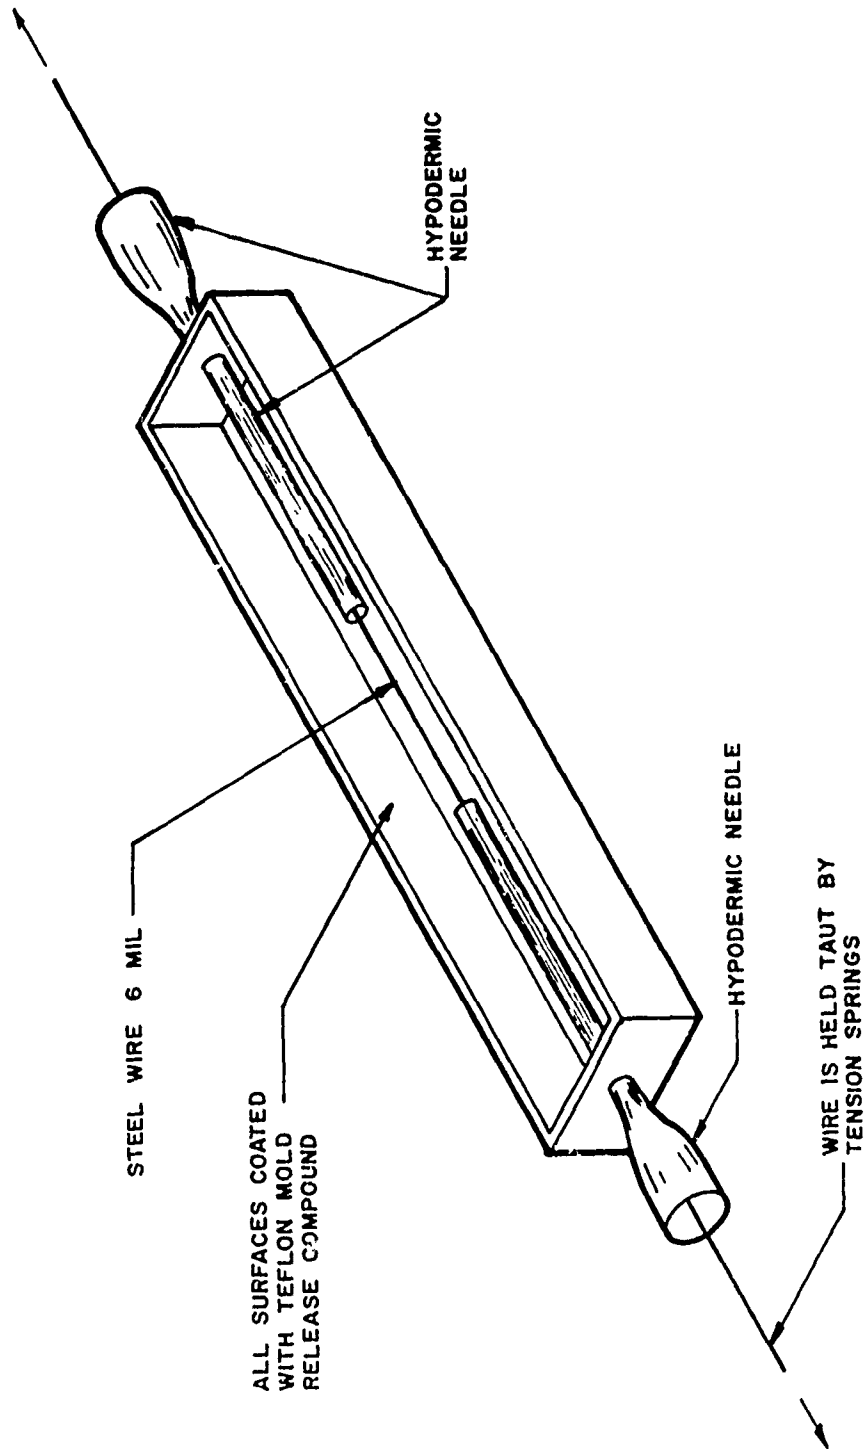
ELASTOMER GAGE MOLD PRIOR TO CASTING
